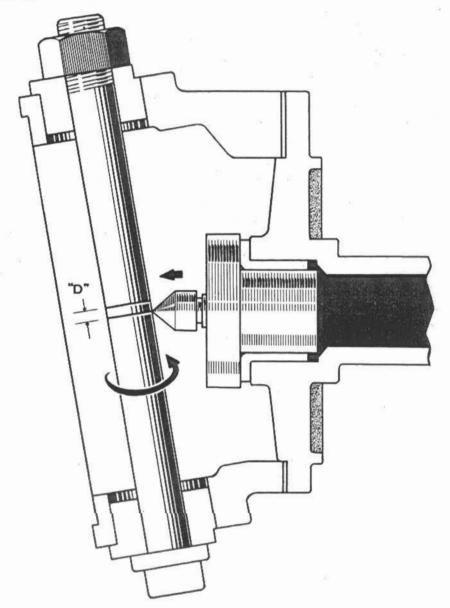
Scribing a Line on Centering Gauge Rod
